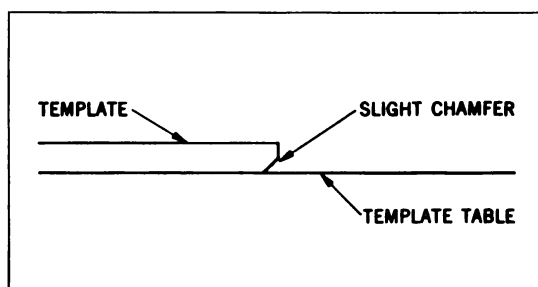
Chamfering lower edge of template contour insures good contact with stylus.
